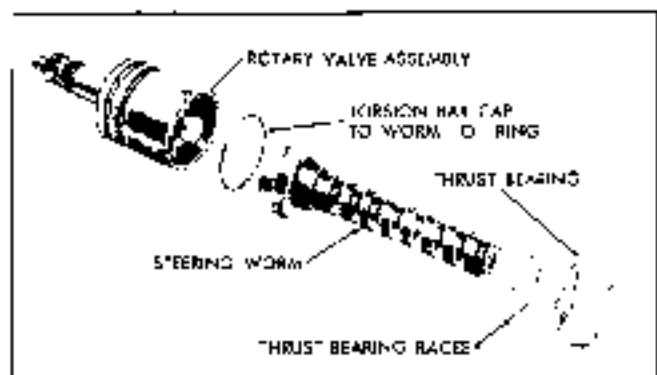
Exploded View of Worm Shaft and Rotary Valve
